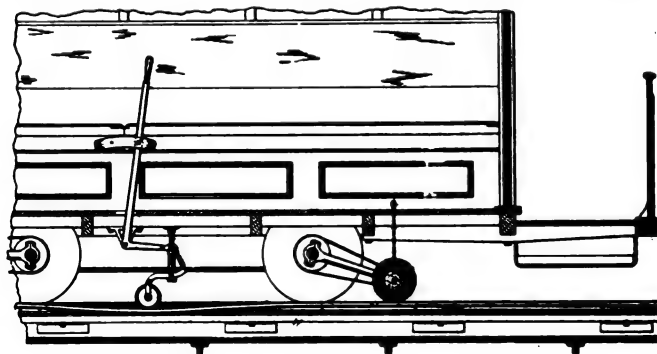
CURTIS' ELECTRIC RAILWAY CONDUIT.
